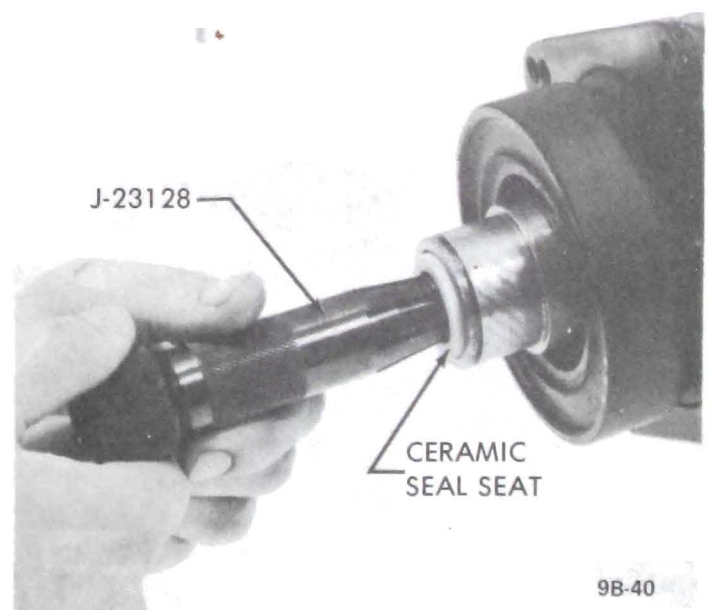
B-46 Removing or Installing Ceramic Shaft Seal Seat
